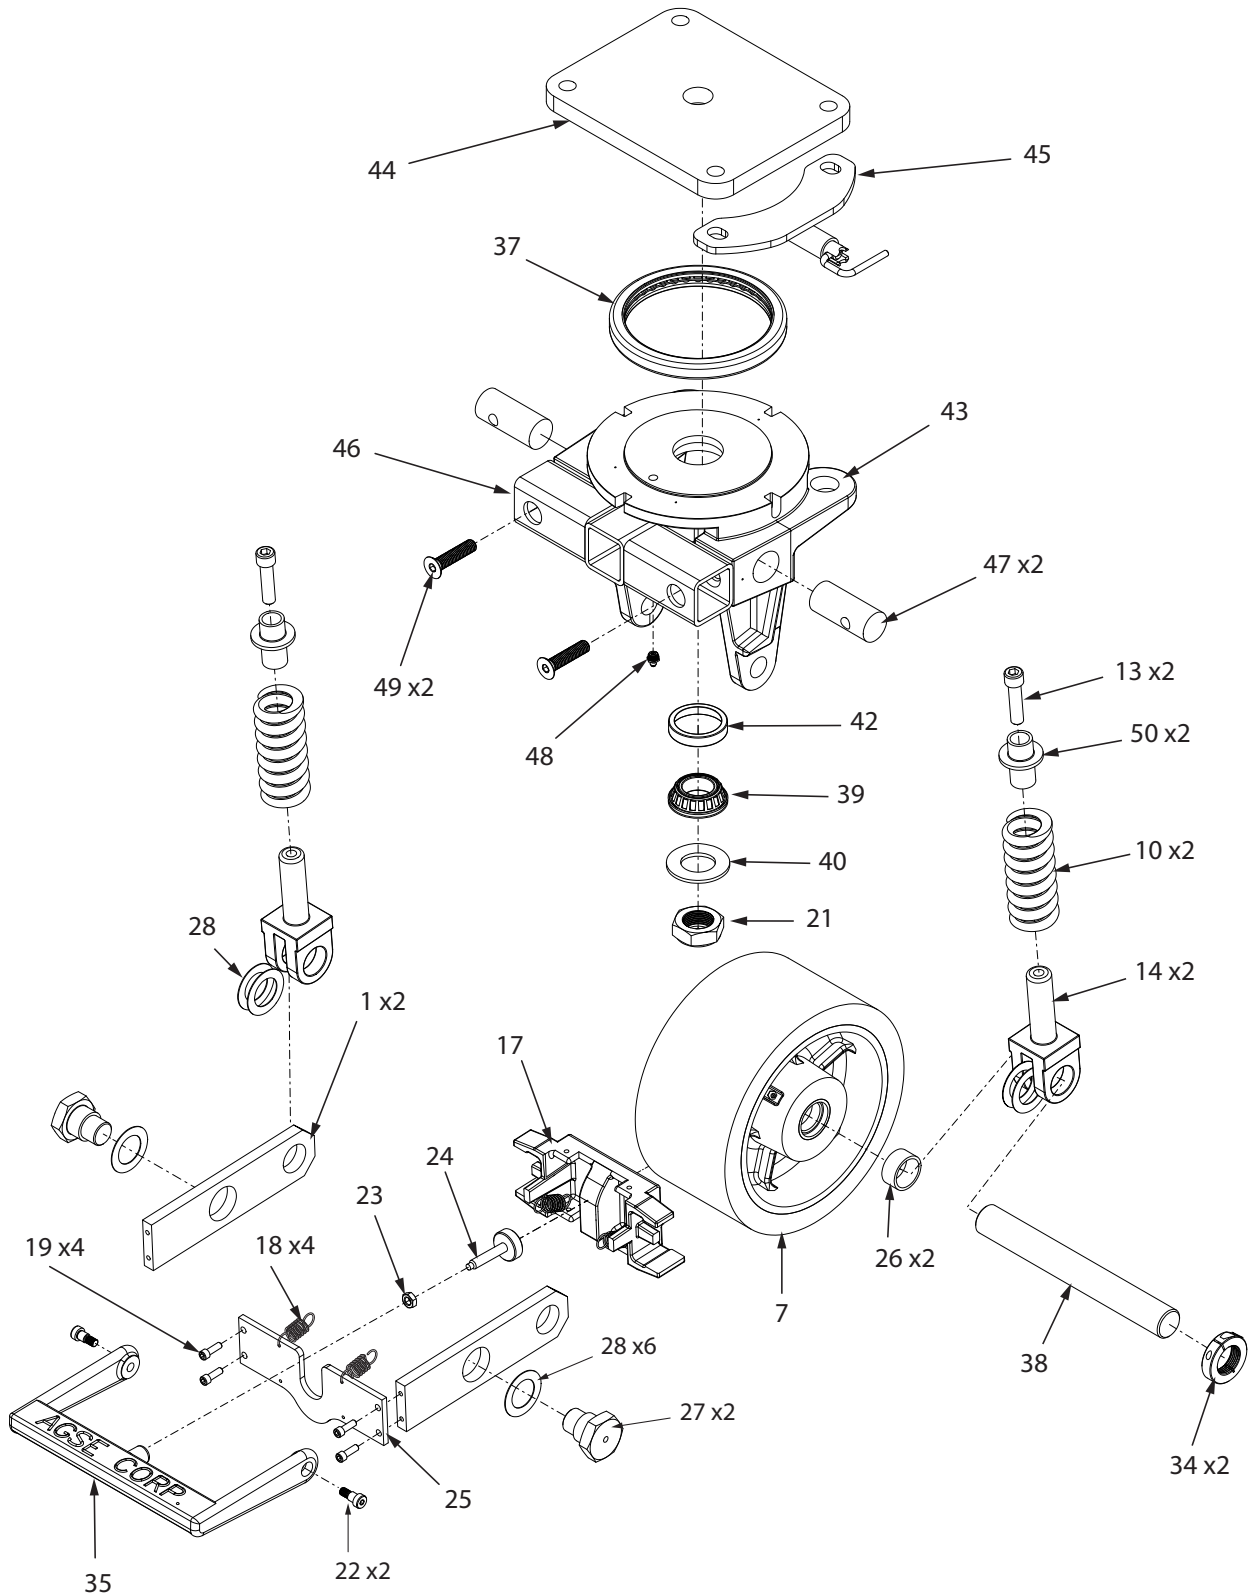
AM-2079-13 Caster Assembly - For Use With 956A8600 Leap 1B
